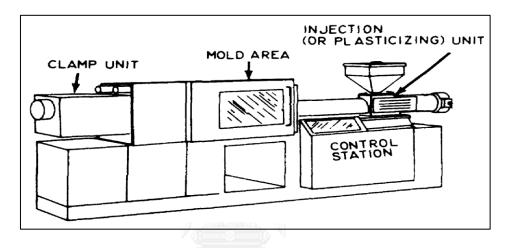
Layout of an injection moulding machine (Rosato et al., 2000)
